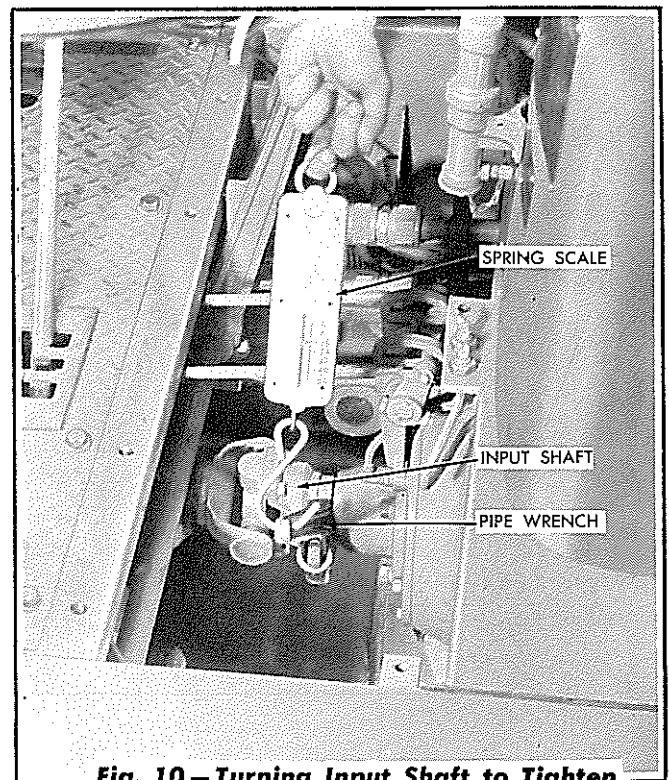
Turning Input Shaft to Tighten Drive Sprocket Nut
